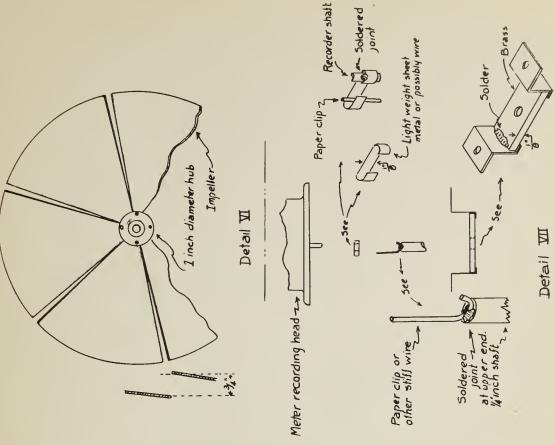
Construction of impeller vanes (detail VI) and parts connecting rotating shaft and water-meter recording head (detail VII).
